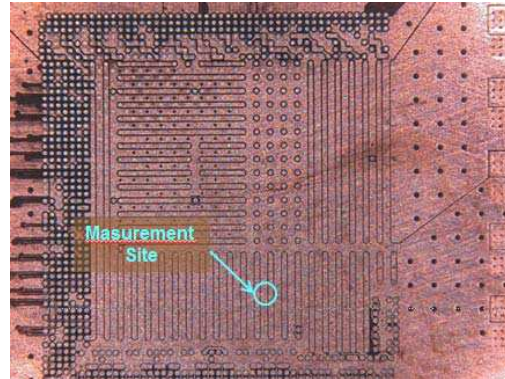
Top soldermask layer of both packages are removed to access the measurement site.
